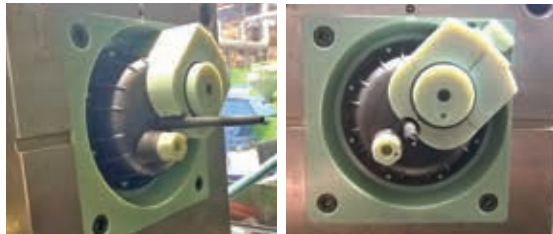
An injected part in the molds attached to the steel plates and to the injection machine
